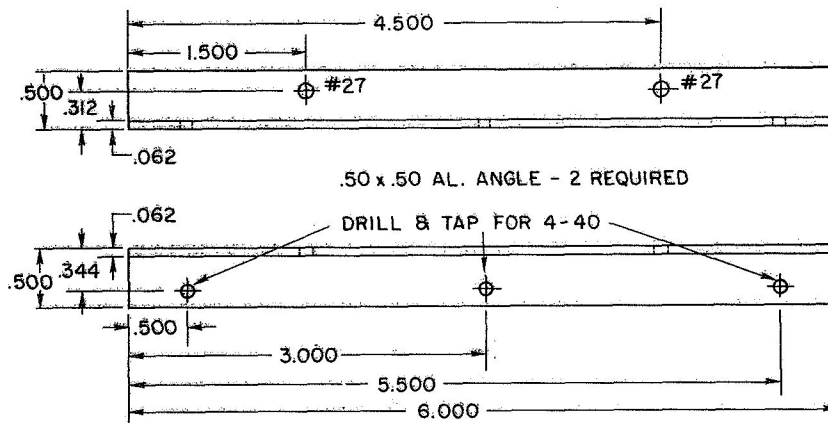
RECEIVER-BOARD MOUNTING BRACKET.
